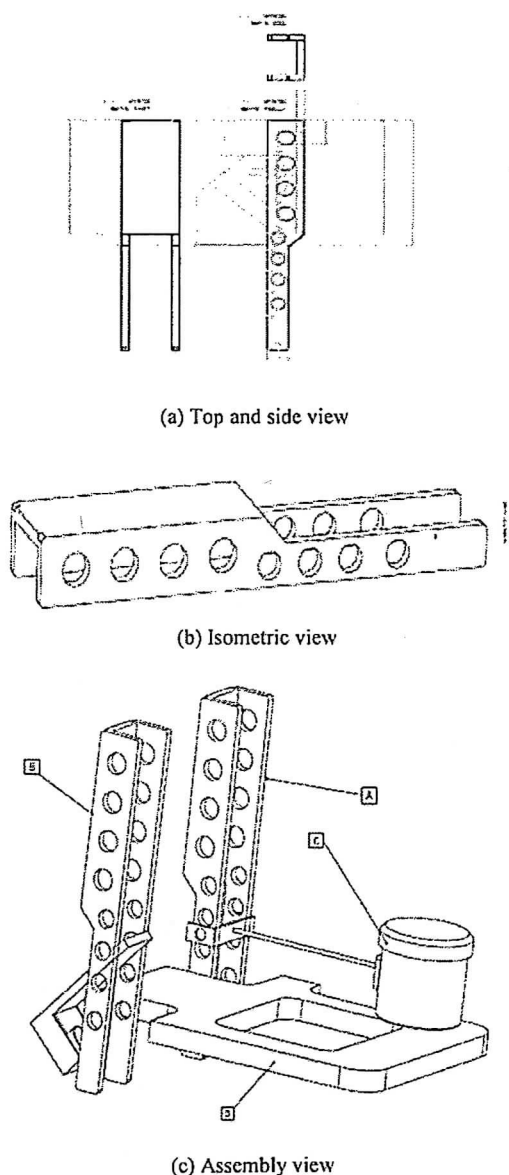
Final pedals system design (a) top and side view, (b) isometric view, (c) assembly view
